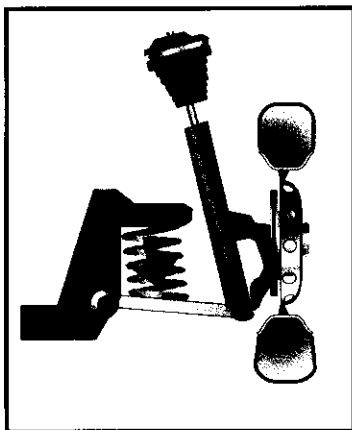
Modified Strut - Spring Mounted Between Frame and Lower Control Arm
